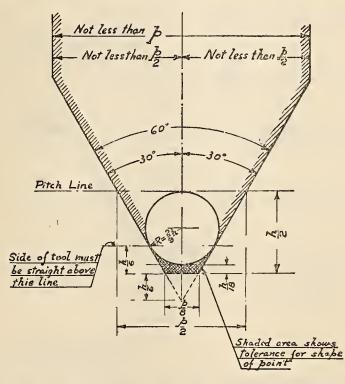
Shape for cutter or single point lathe tool not intended to trim crest of thread
